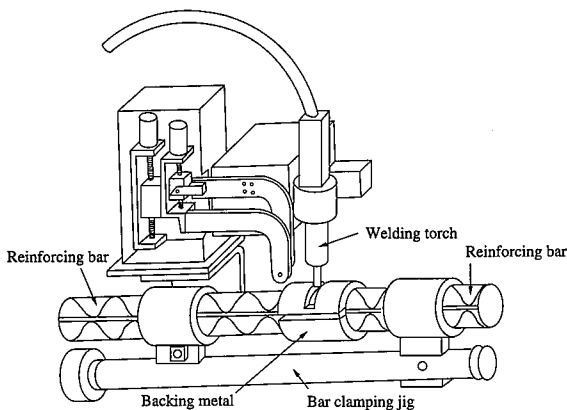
Example of welding jig for automatic enclosed welder
